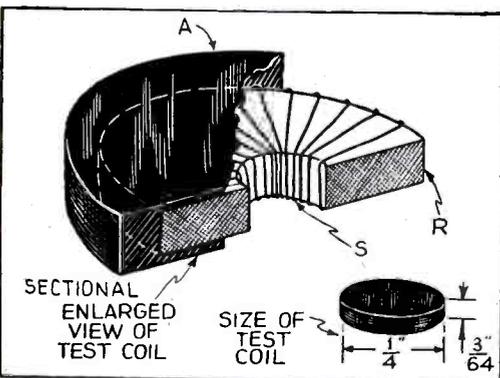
Greatly enlarged view of the exploring coil constructed of an R.F.-iron core, toroidal winding and protective metal covering and shield. The actual size, as shown, is 1/4-in. wide and 3/64-in. thick.
